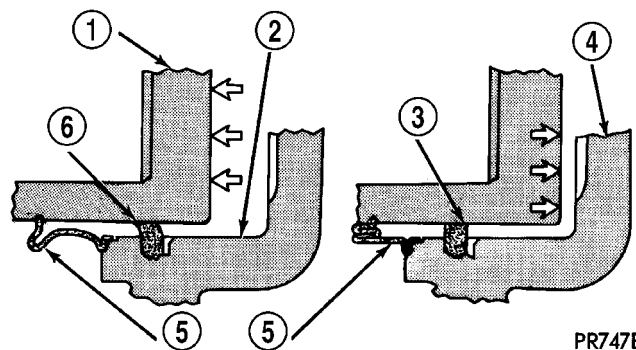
Piston Seal Function for Automatic Adjustment Of Front Brakes
